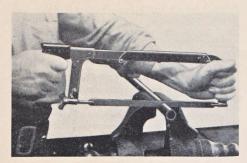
You can cut SIX TIMES more metal with Atkins Silver Steel Hack Saw Blades
